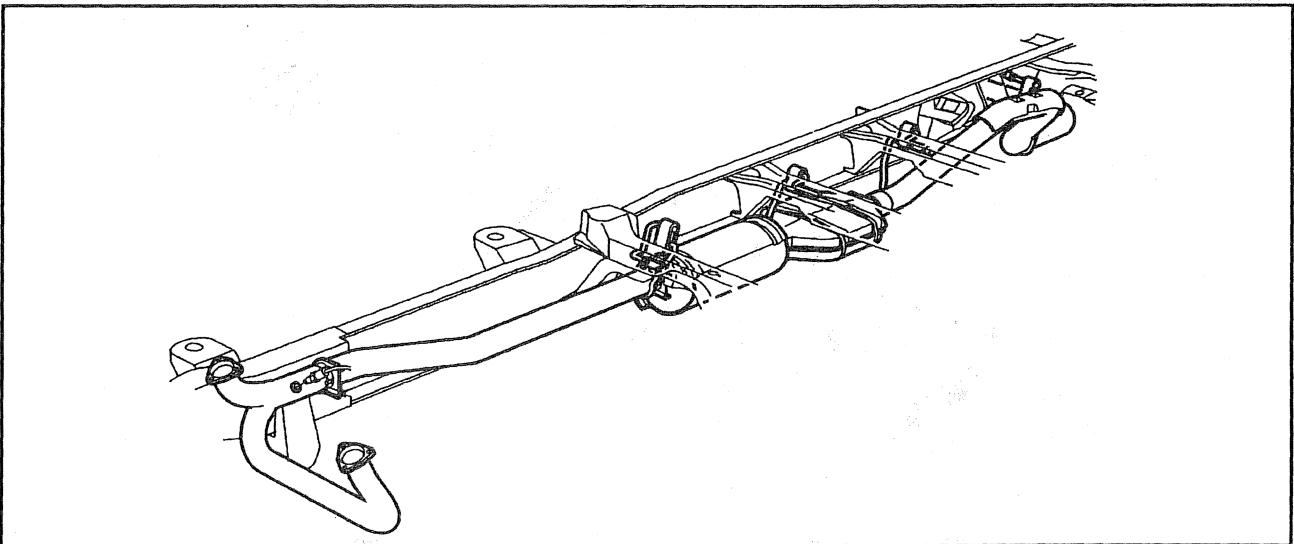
Exhaust System - C 3 Cab Chassis (Model 314 w/L19 & 15,000 GVW)
